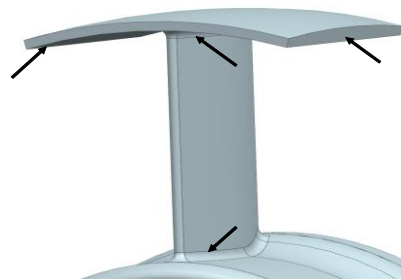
A sector with some tagged welds indicated by arrows to be evaluated.
